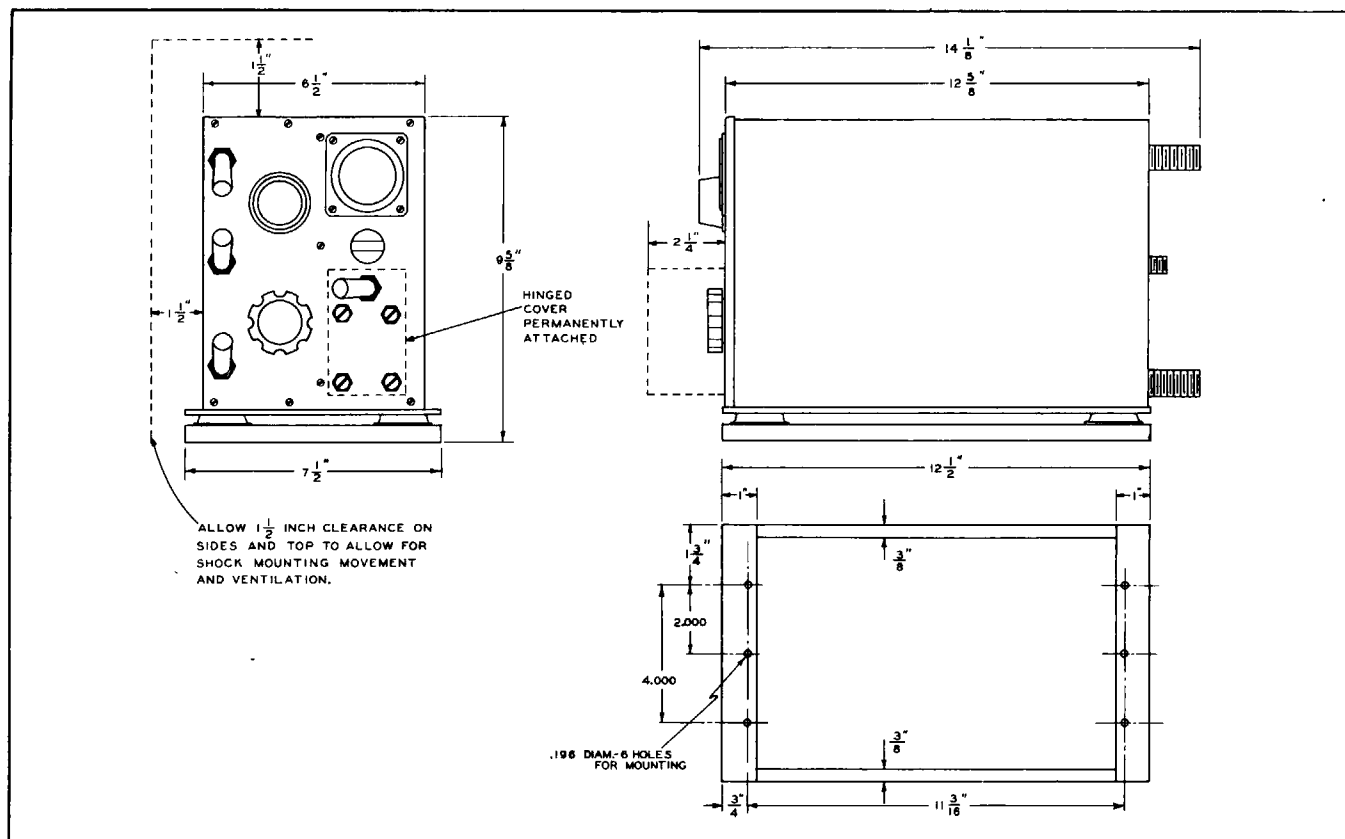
Synchronizer SN-17/APS-10—Outline Dimensions
